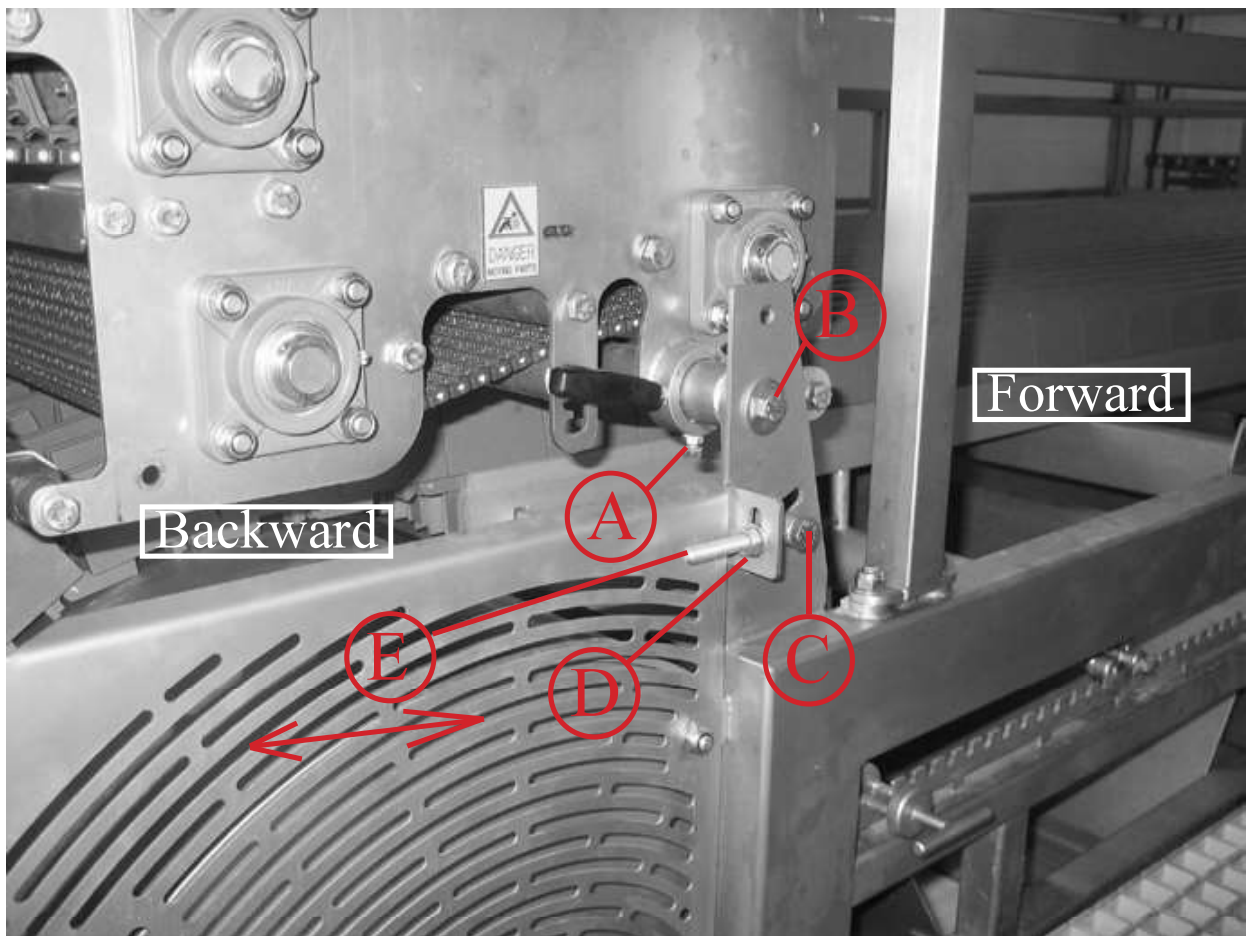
m. Side-view of Style feeding system showing adjustments for side plates on top of grading chains.
